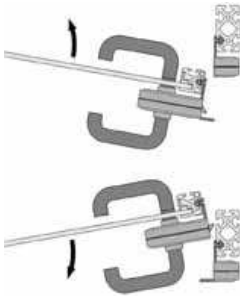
Open to all applications – Swing doors can be made to open inwards or outwards. (pict2_ss.tif)
